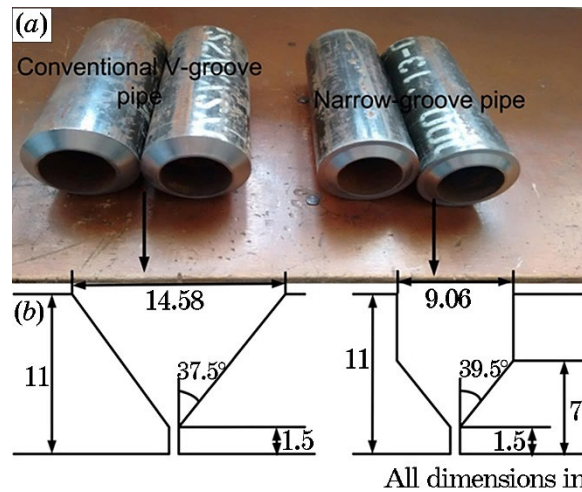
(a) P92 pipe with conventional and narrow weld-groove design (b) Conventional V-groove and narrow-groove design.
